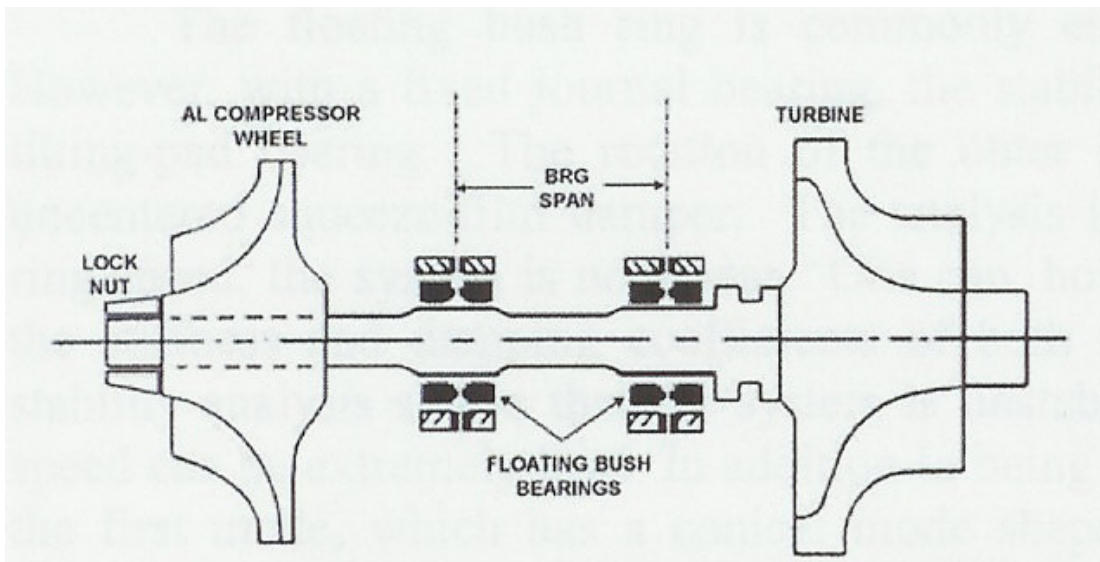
Turbocharger Rotor-Bearing System [6]
